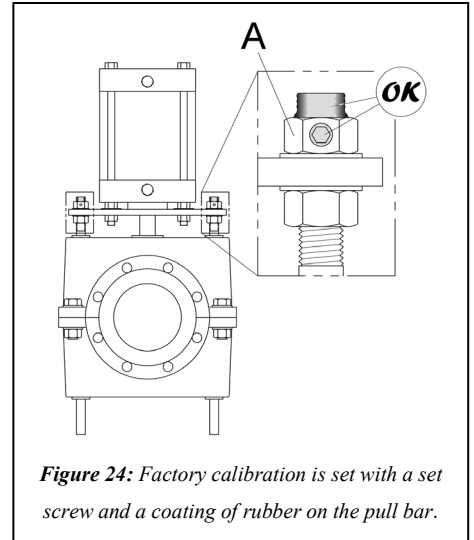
Factory calibration is set with a set screw and a coating of rubber on the pull bar.
